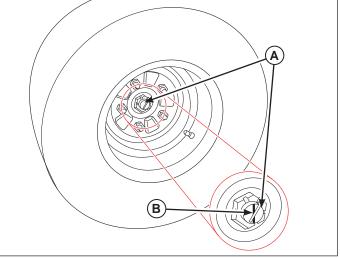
Inspecting the Castle Nut A. Wheel Motor Axle Shaft B. Yellow Line
